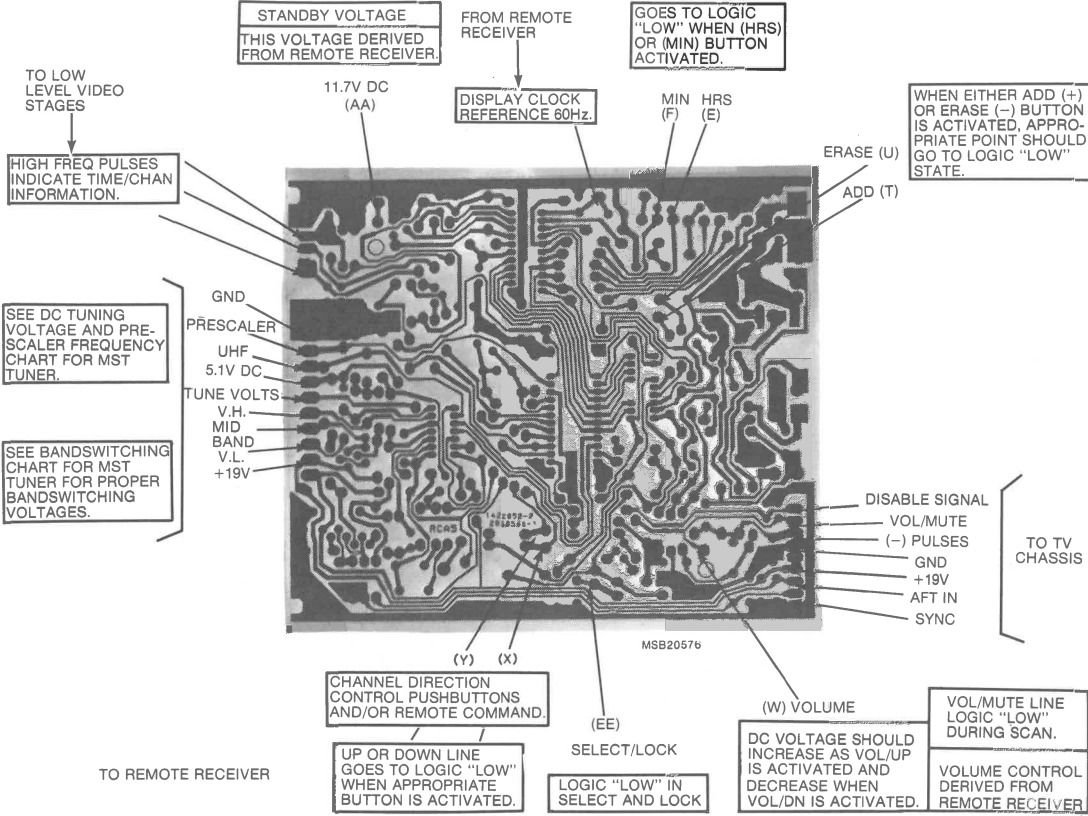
MSC013RA — Frequency Synthesis Control Module Circuit Board Bottom View
